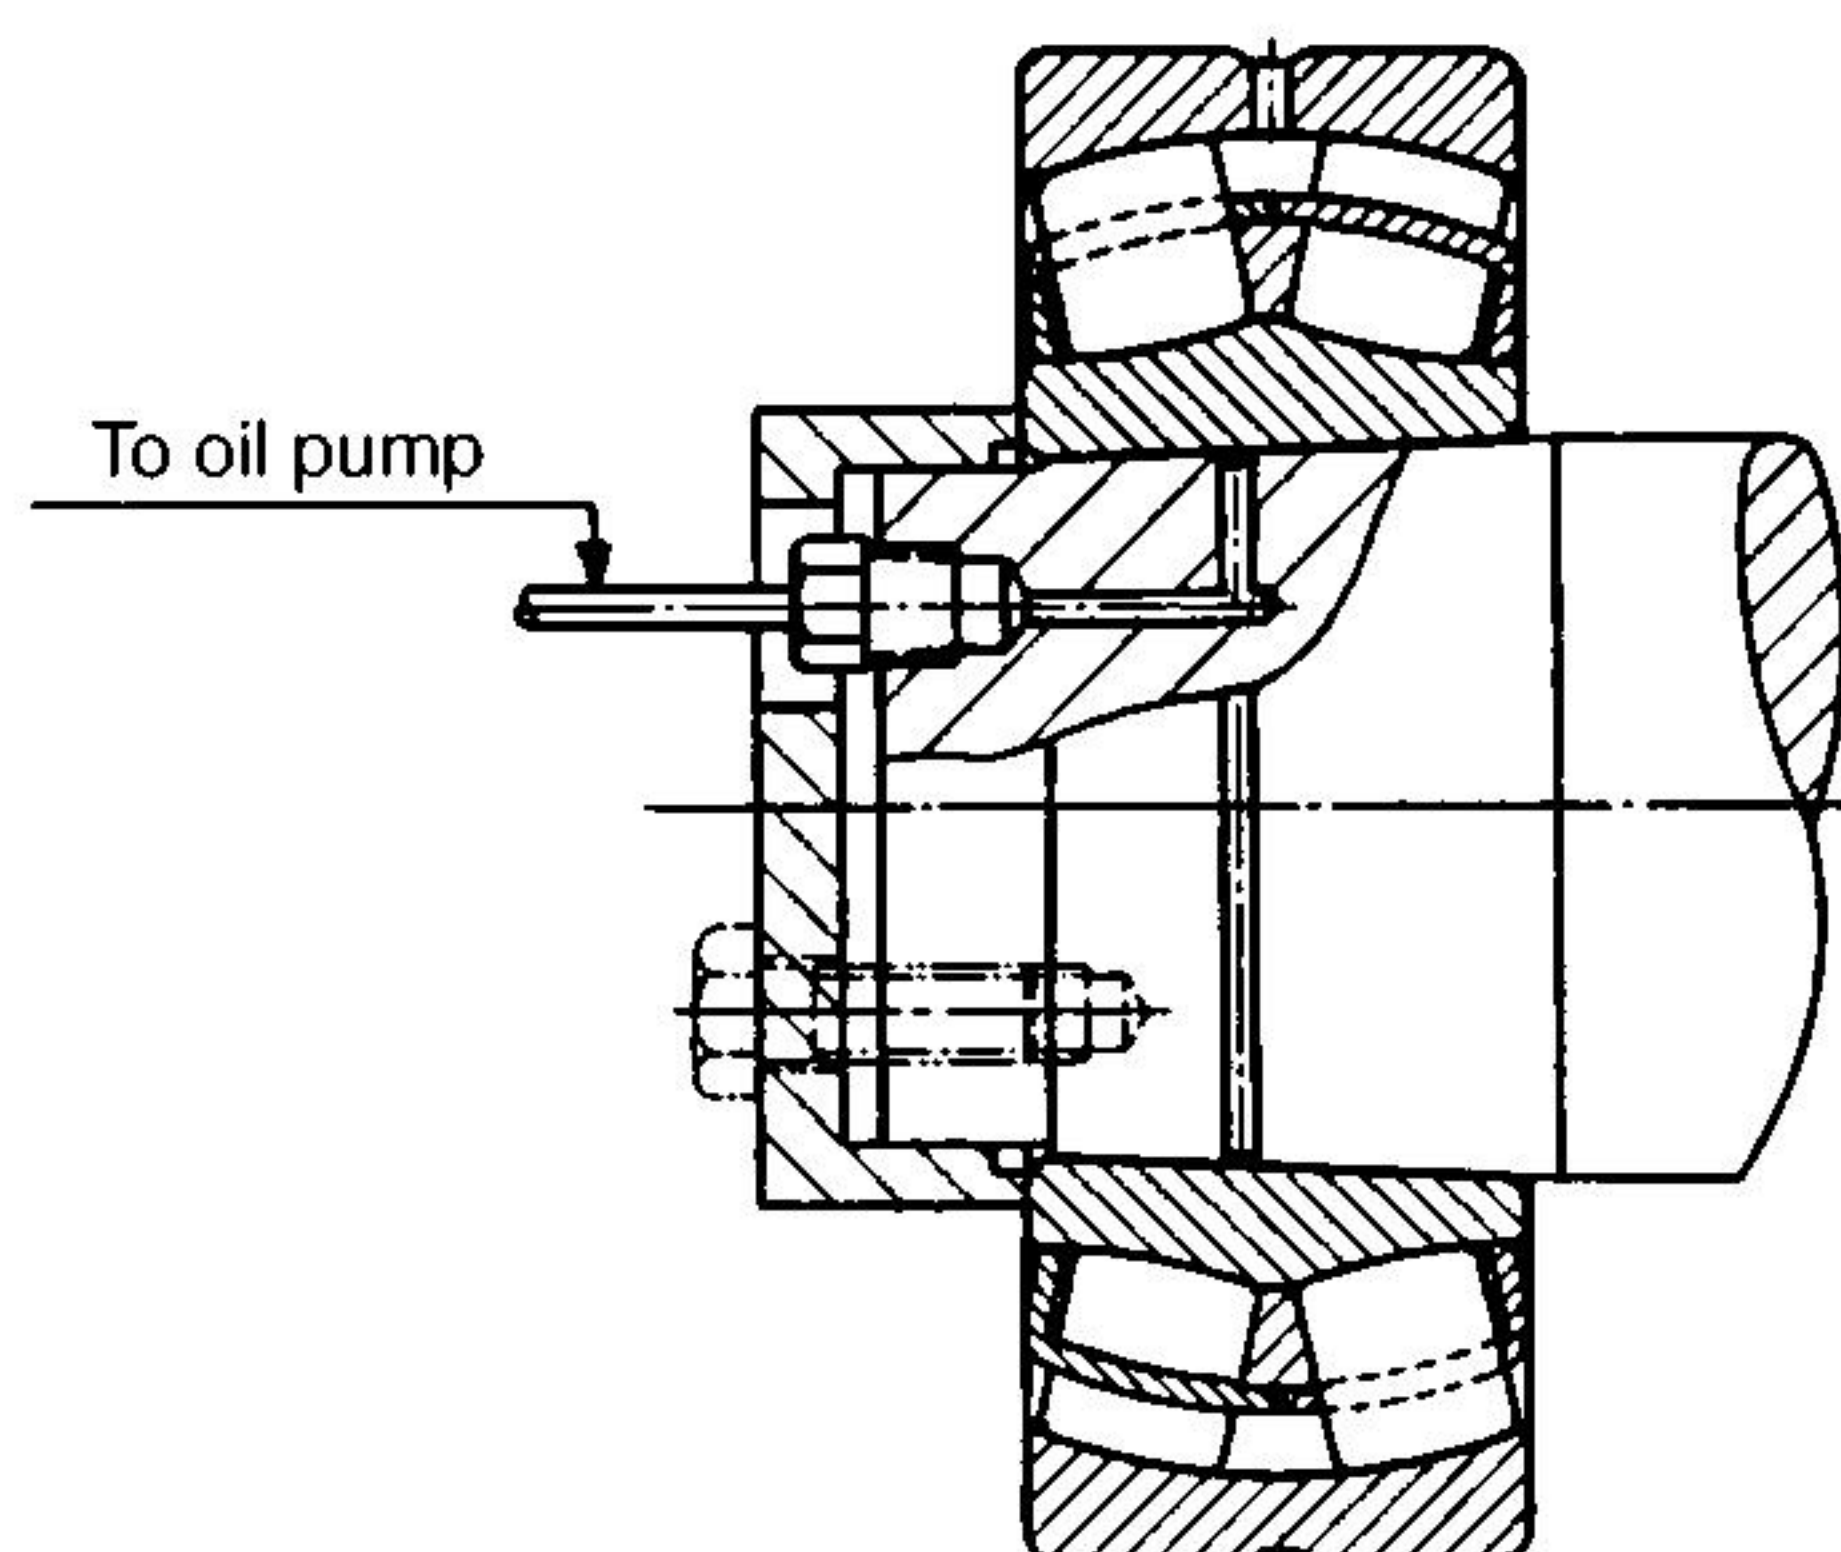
Drilling and grooving of the shaft to reduce bearing driving force.
